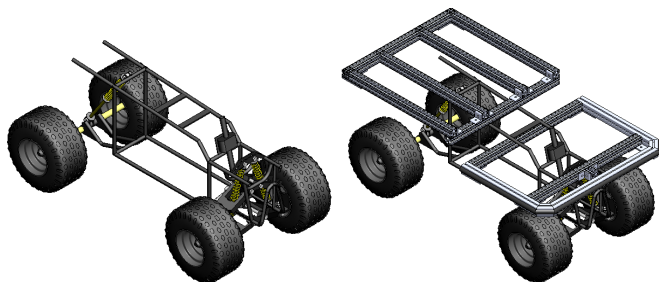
CAD model of Base frame and suspension (left) and secondary 80-20 Mounting Frame (right)
